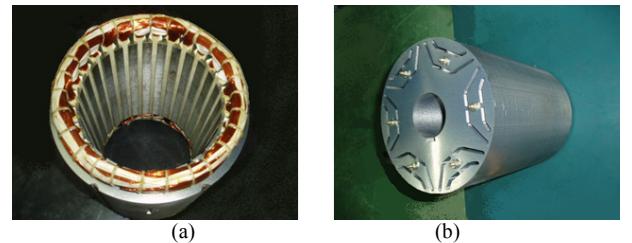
Configuration of prototype motor: (a) stator and (b) rotor.
